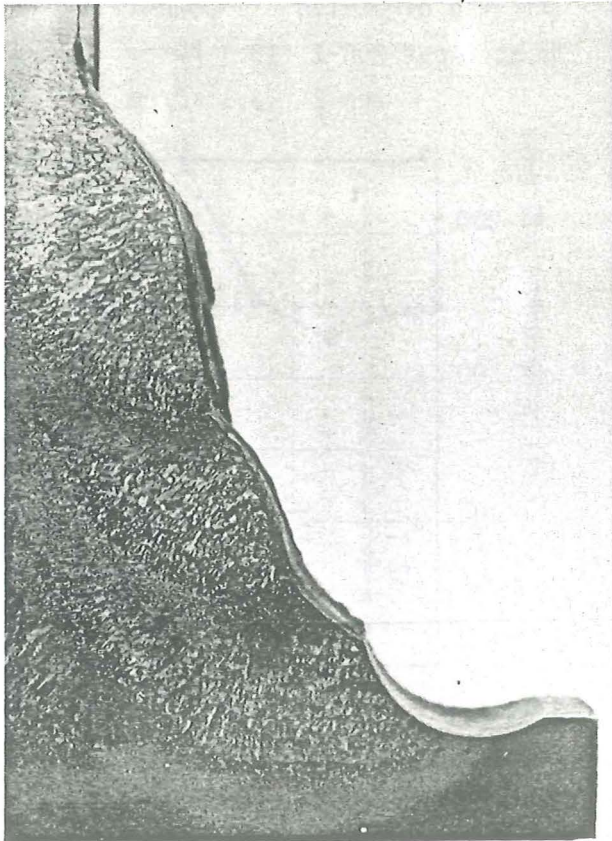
Illustration of weld finishing by means of toe burr grinding.
